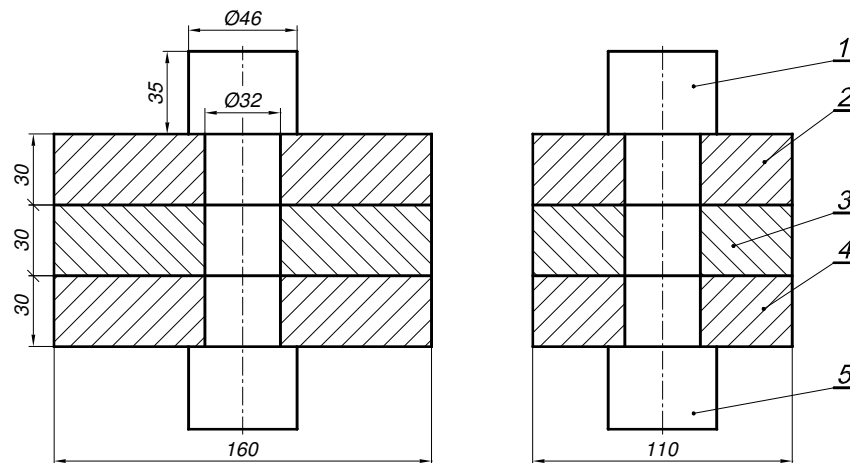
Geometry of foundation bolted joint model with the steel chock: 1 – top pressure stamp, 2 – top plate, 3 – steel chock, 4 – bottom plate, 5 – bottom pressure stamp
